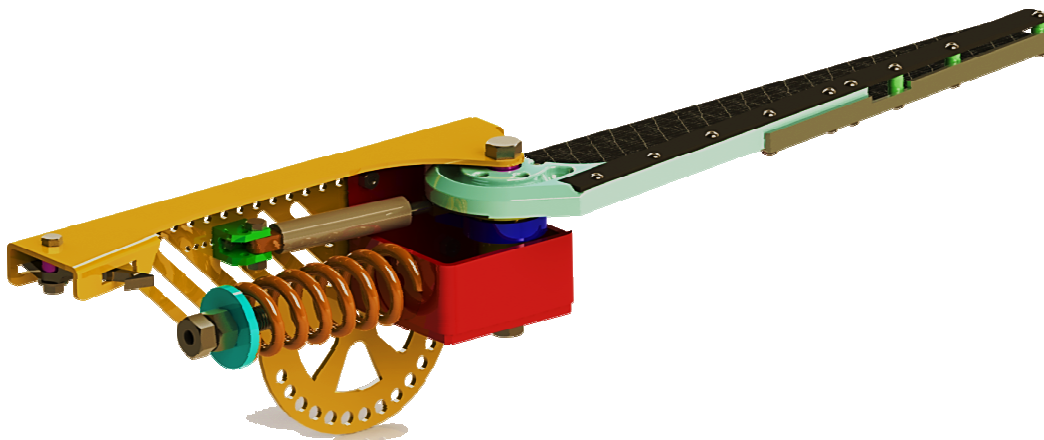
LAUNCHING ASSEMBLY (FIRED)
